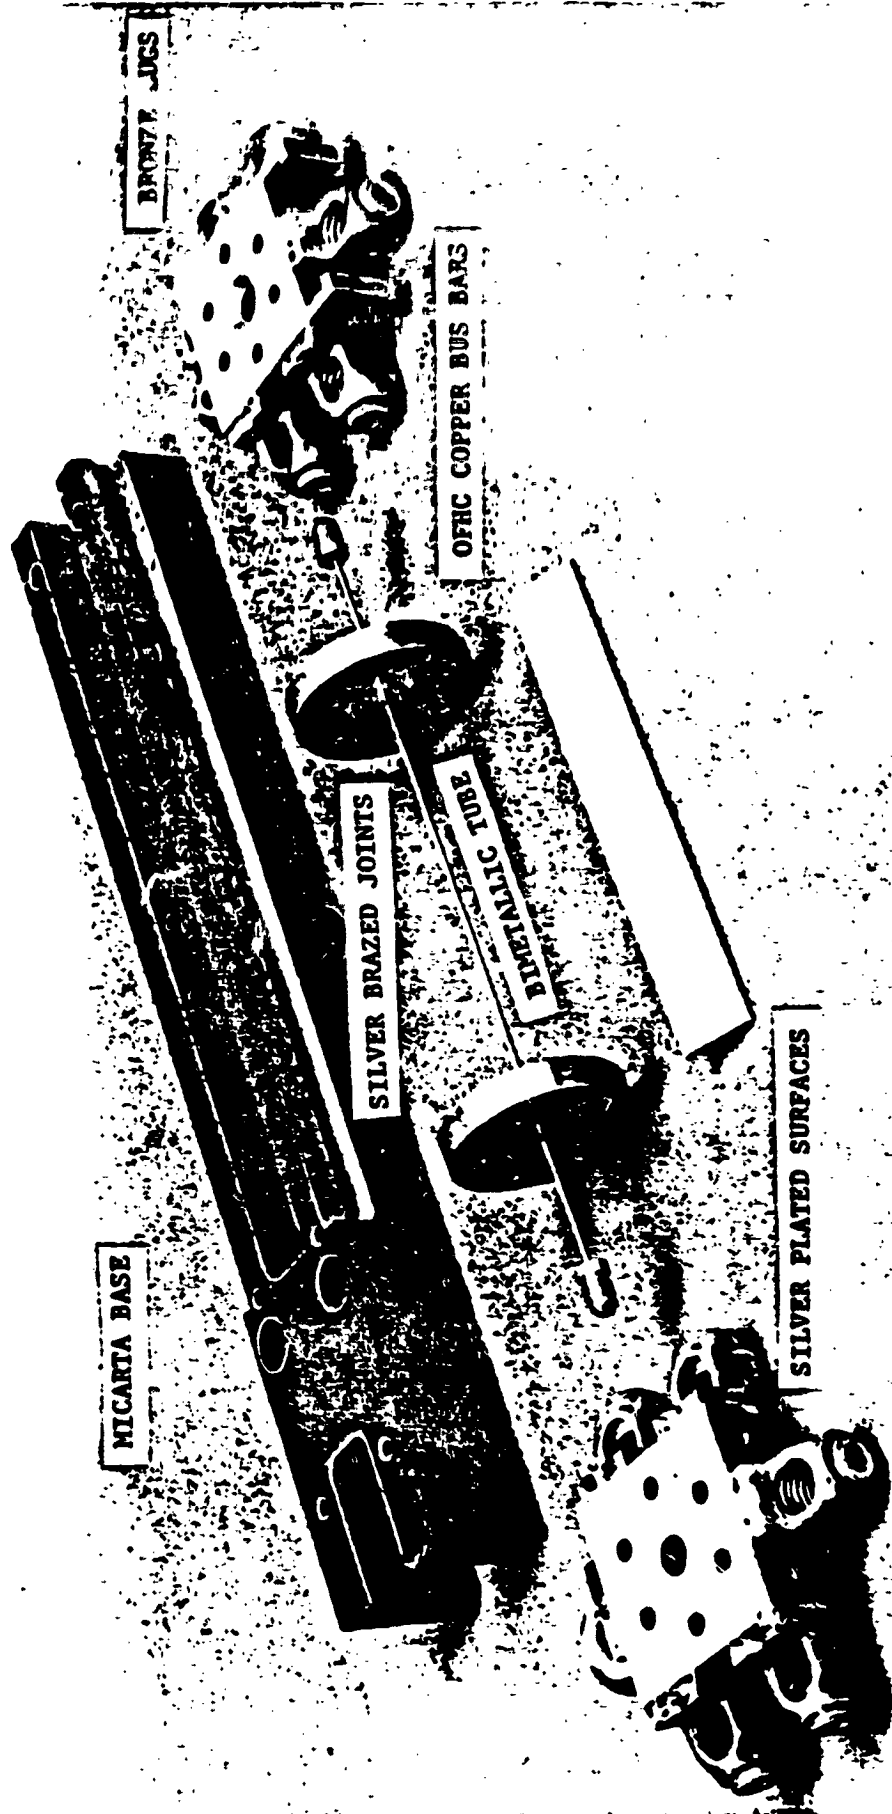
Exploded View of the Bus Bar/Bismuthic Tube Assembly. The Circular Bus, Tube, and AN Settings. Comprise a Test Specimen Unit.
